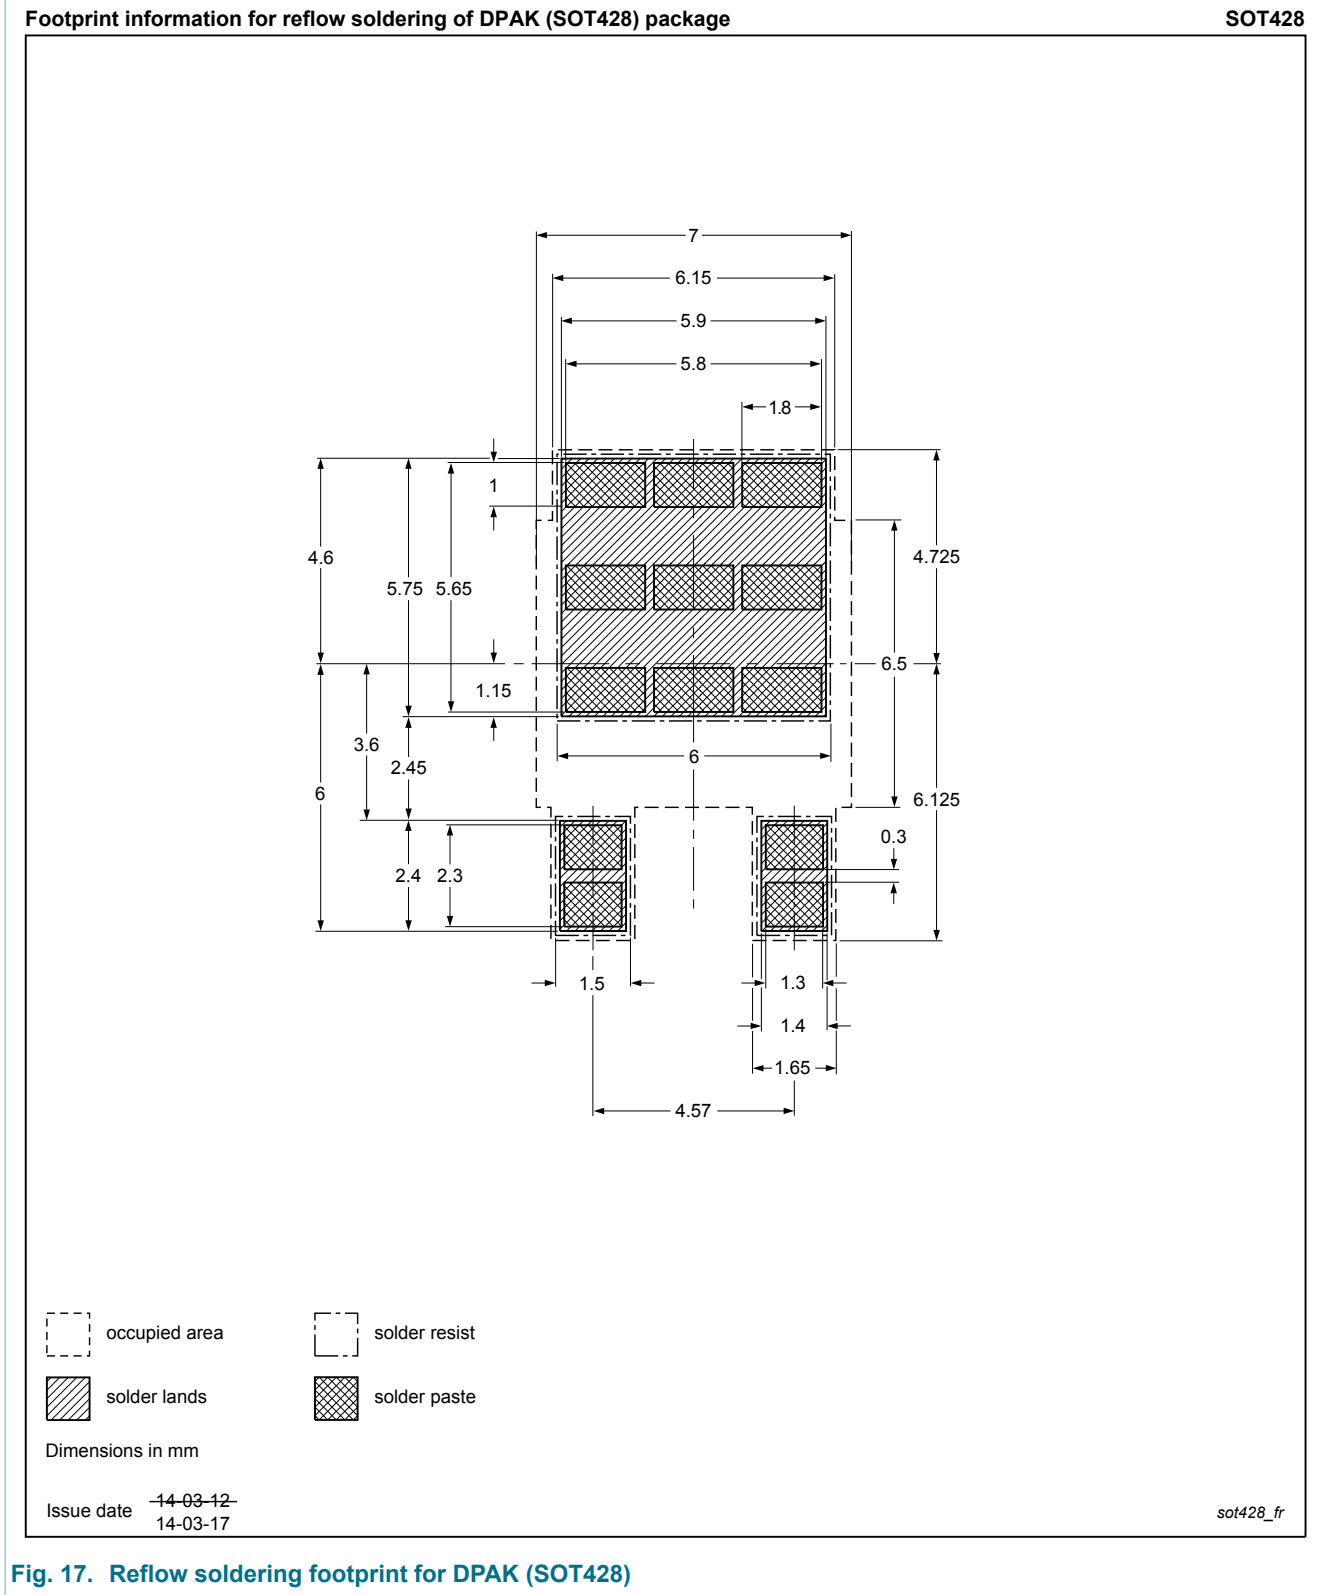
Reflow soldering footprint for DPAK (SOT428)
